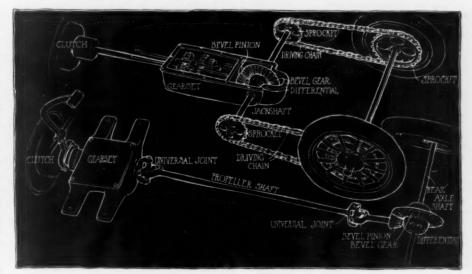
EXAMPLES OF DOUBLE CHAIN AND SHAFT FINAL DRIVE SYSTEMS
